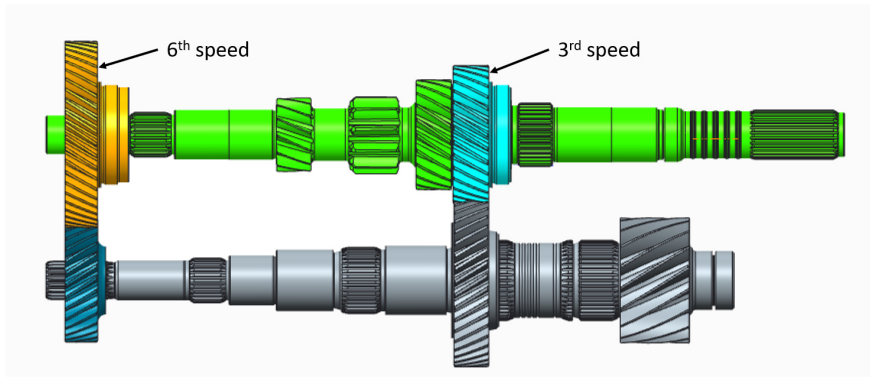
Two selected gearsets to be replaced with the gearsets made from the PM material instead of standard wrought steel.
